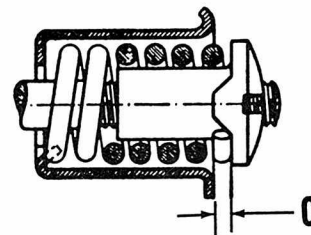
Clearance (C) should be more than 0.06 inch. If clutch slips when adjusted to minimum clearance, renew plates as necessary.
